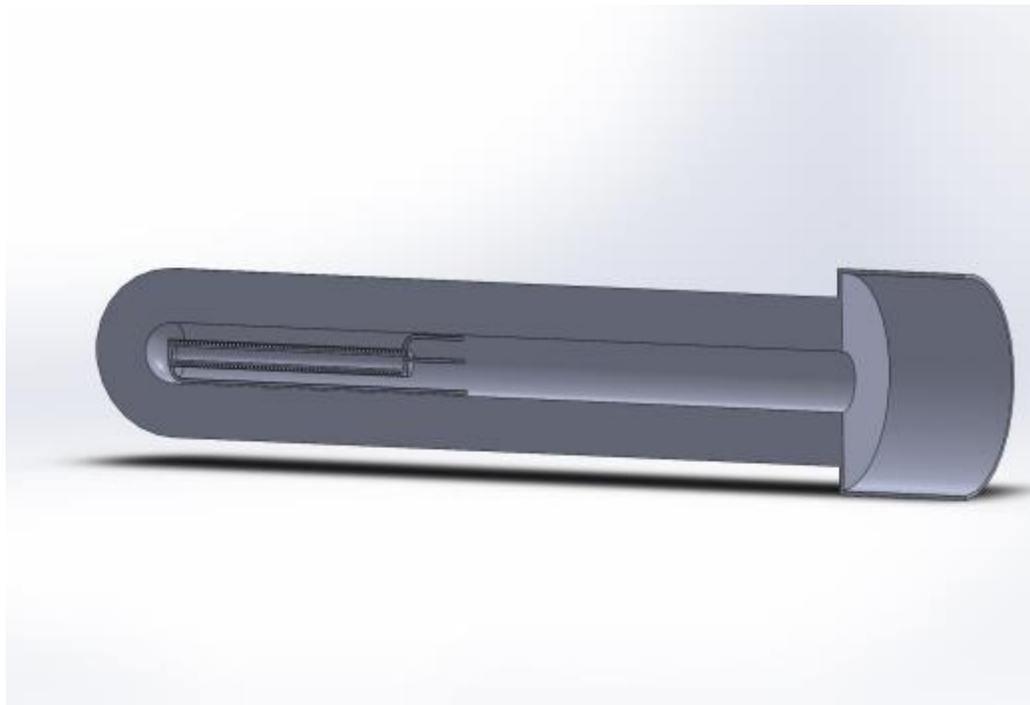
Tube type LDM in the explosion-safe vacuum chamber
